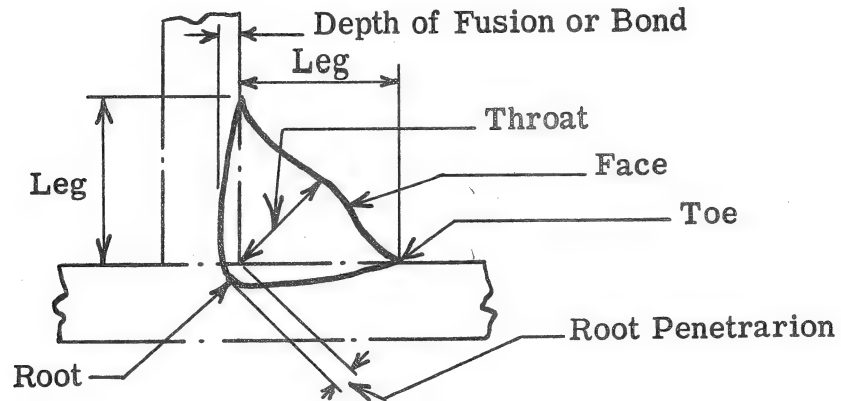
Ideal Fillet Weld Shape
